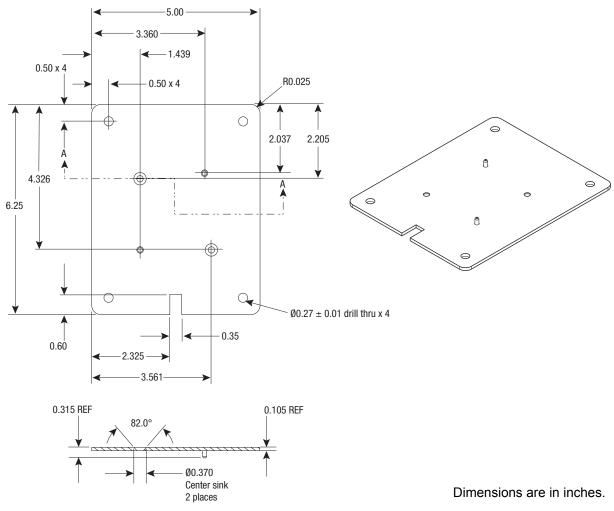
SMART6-L Surface Mounting Plate (01018317)
